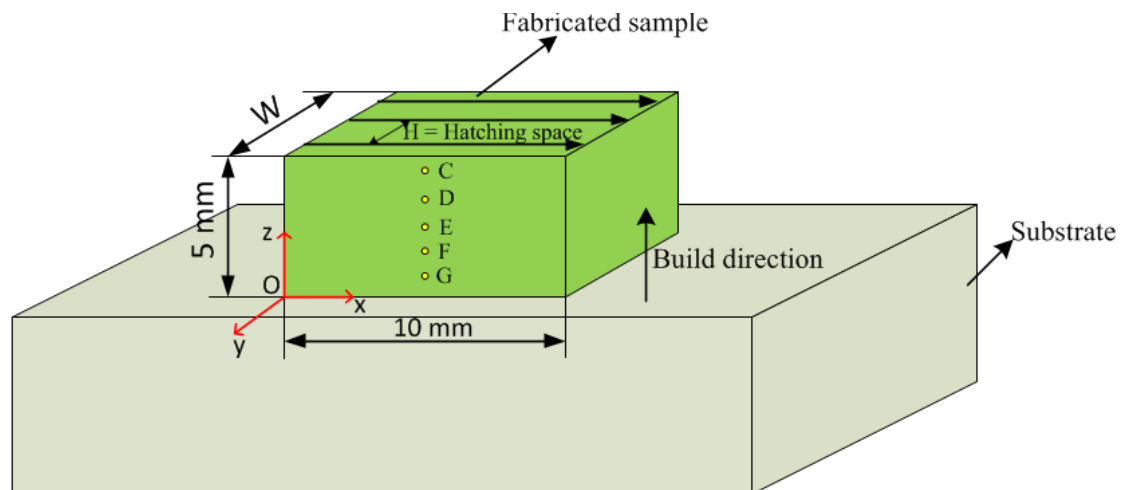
Illustration of the as-build IN718 parts manufactured via L-PBF.
